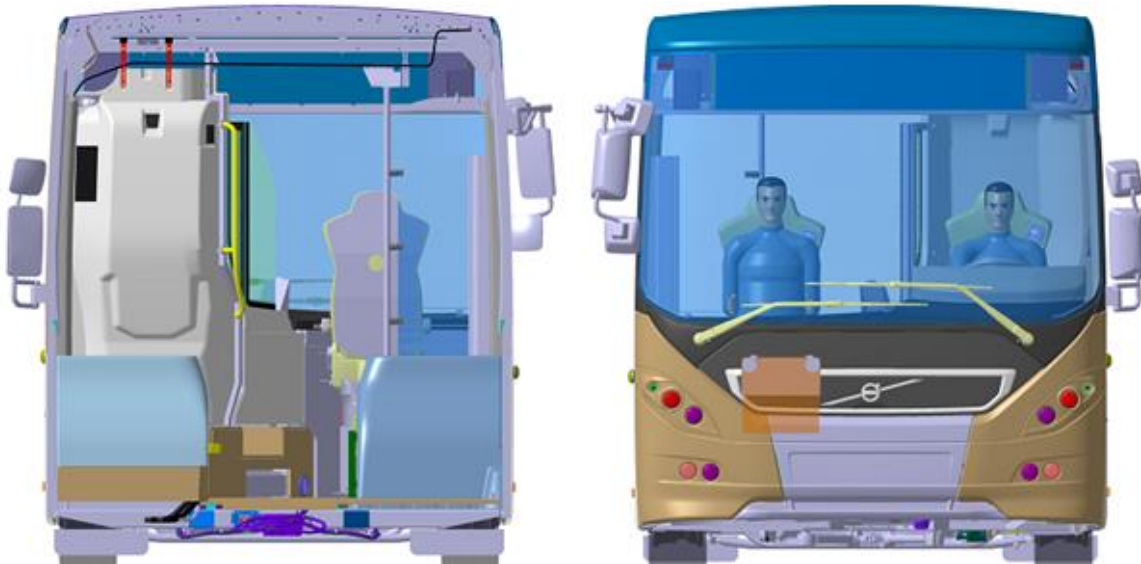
Instructor's mirrors size and placement. a) rear view b) front view.
